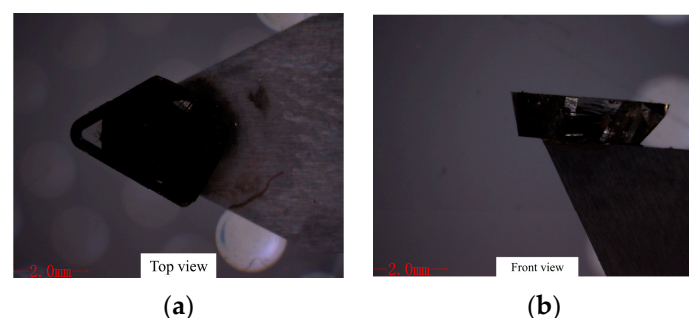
Diamond cutting tool: (a) Top view; (b) Front view.
